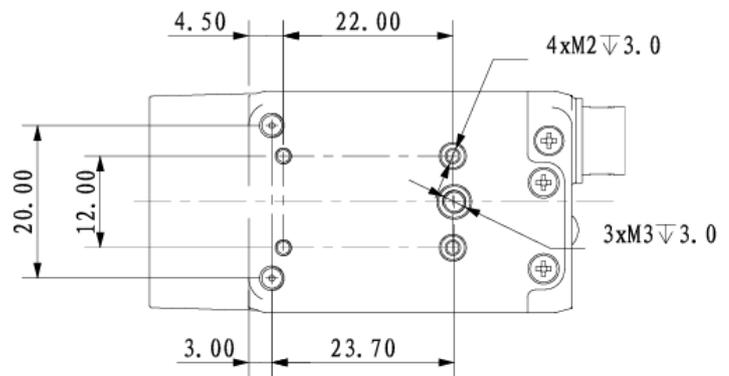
Product dimensions (29mm×29mm×42mm)
